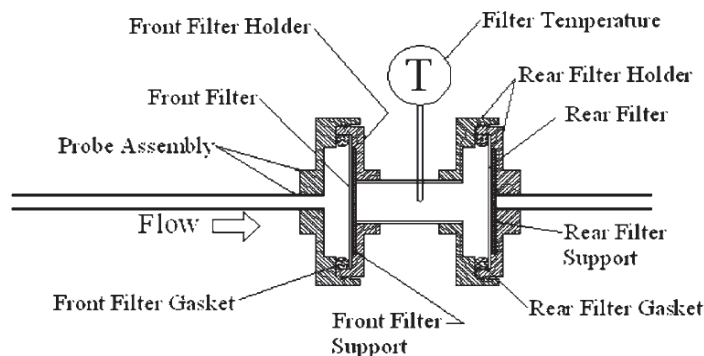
Sample Probe Assembly as specified in ASTM E2515-11
